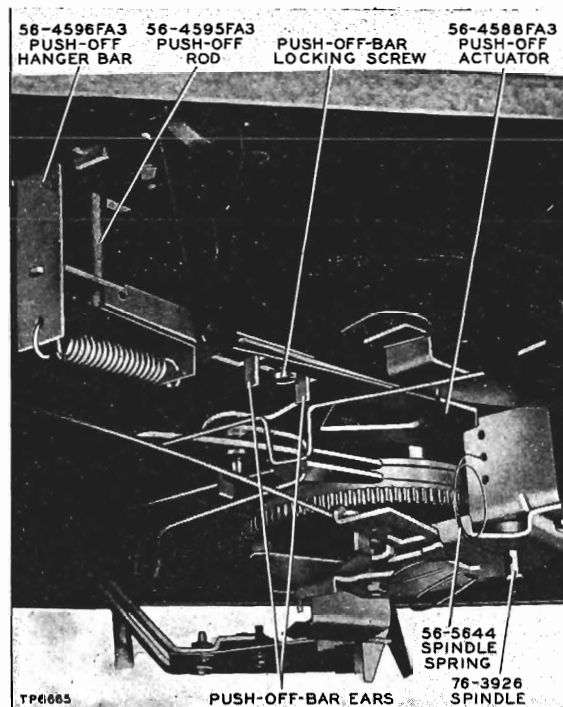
Push-Off Adjustment, Showing Push-Off Actuator in Contact with Roller on Cam Gear
